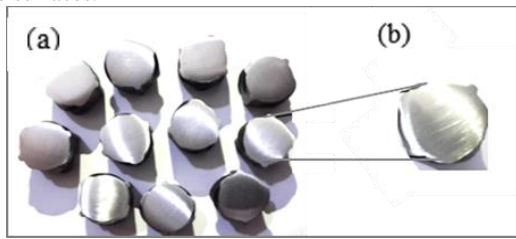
(a) Low Carbon Steel Specimens after Grinding down to 320, with Smooth and Flat Surfaces, and (b) A Magnified Image of one Specimen to Show the Surface Details.
